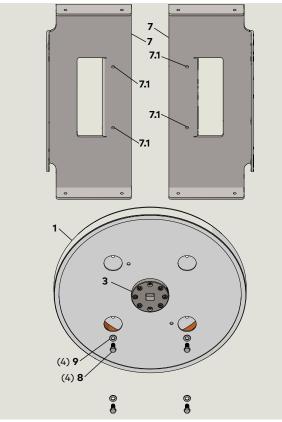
Mounting plates and Motion Assist 360 drive
